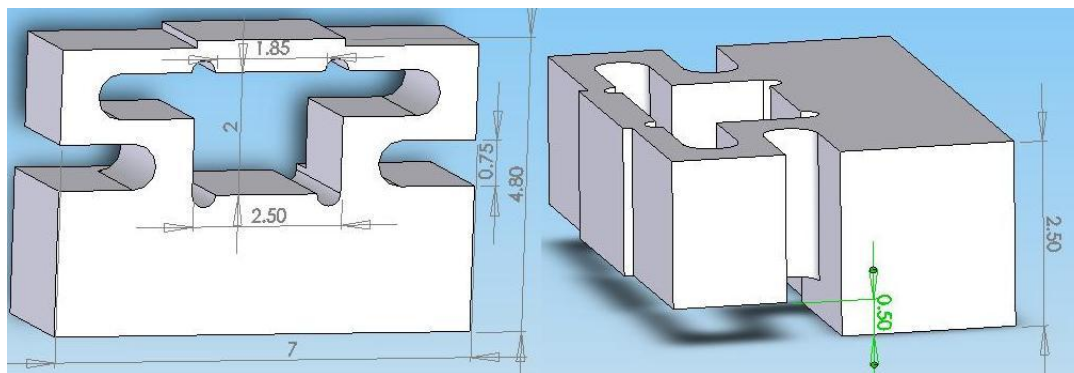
The piezo flexure designed to hold a 2mm cube piezo. The slot for the piezo has recessed material to prevent electrical shorting of the electrodes through contact with the stainless steel flexure. The view in the right shows how the flexure can be mounted onto a surface such that the piezo will push/pull parallel to the mounting surface. All units are in millimeters.
